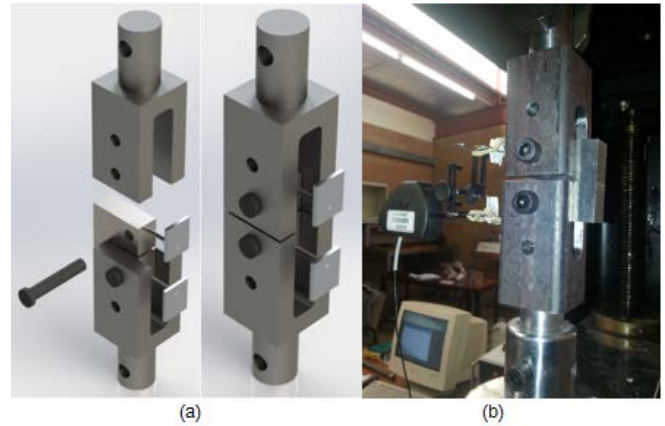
(a) Specimen mounting arrangement 3D model (b) Actual machine
